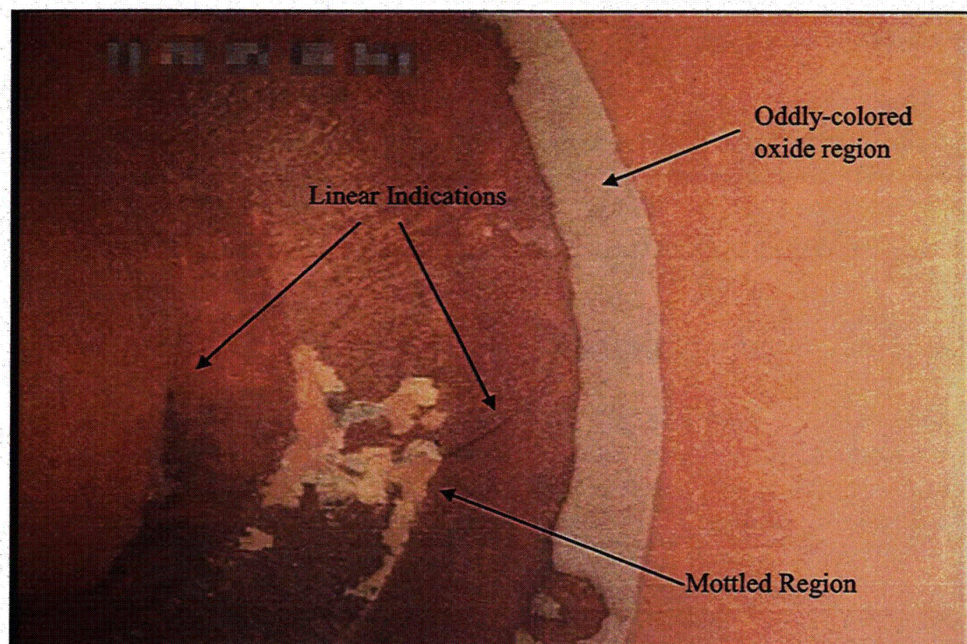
Complex Surface Geometry and Deposit Layering on BWR Component
